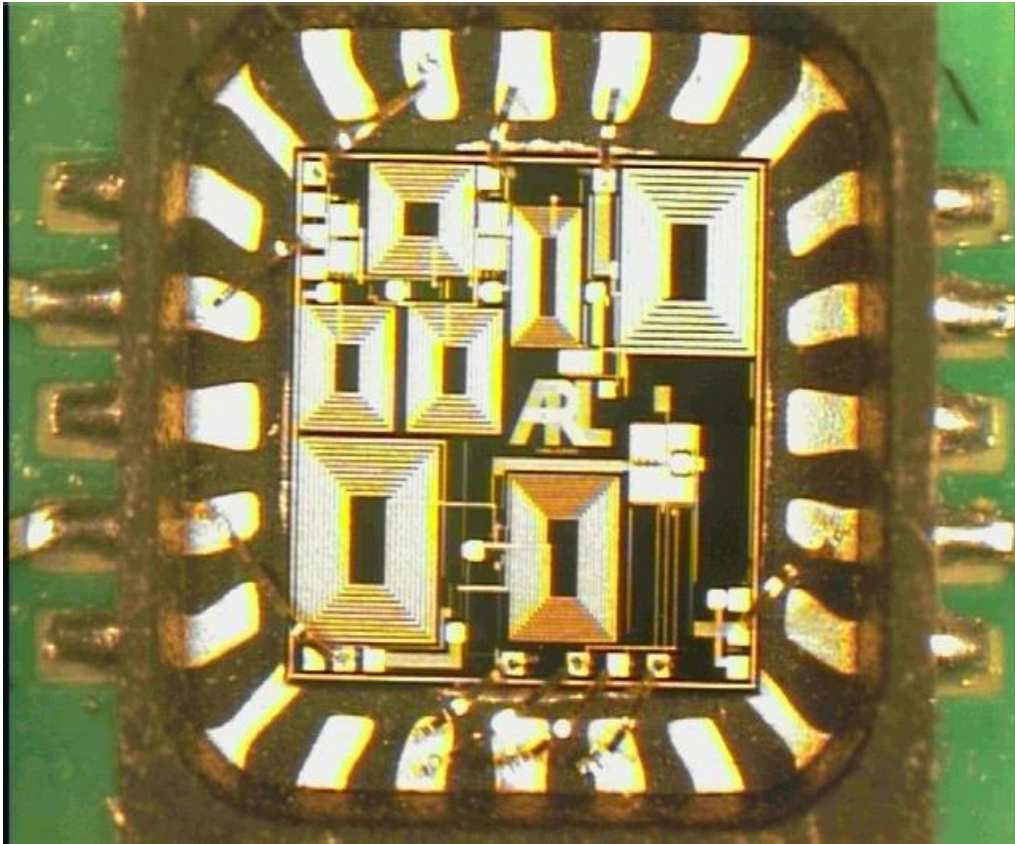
ARL21M425 assembled in a 4x4mm QFN package.
